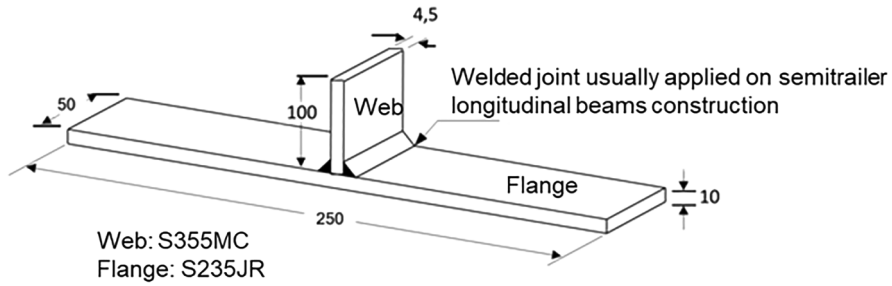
Scheme of T-shaped welded specimens.
